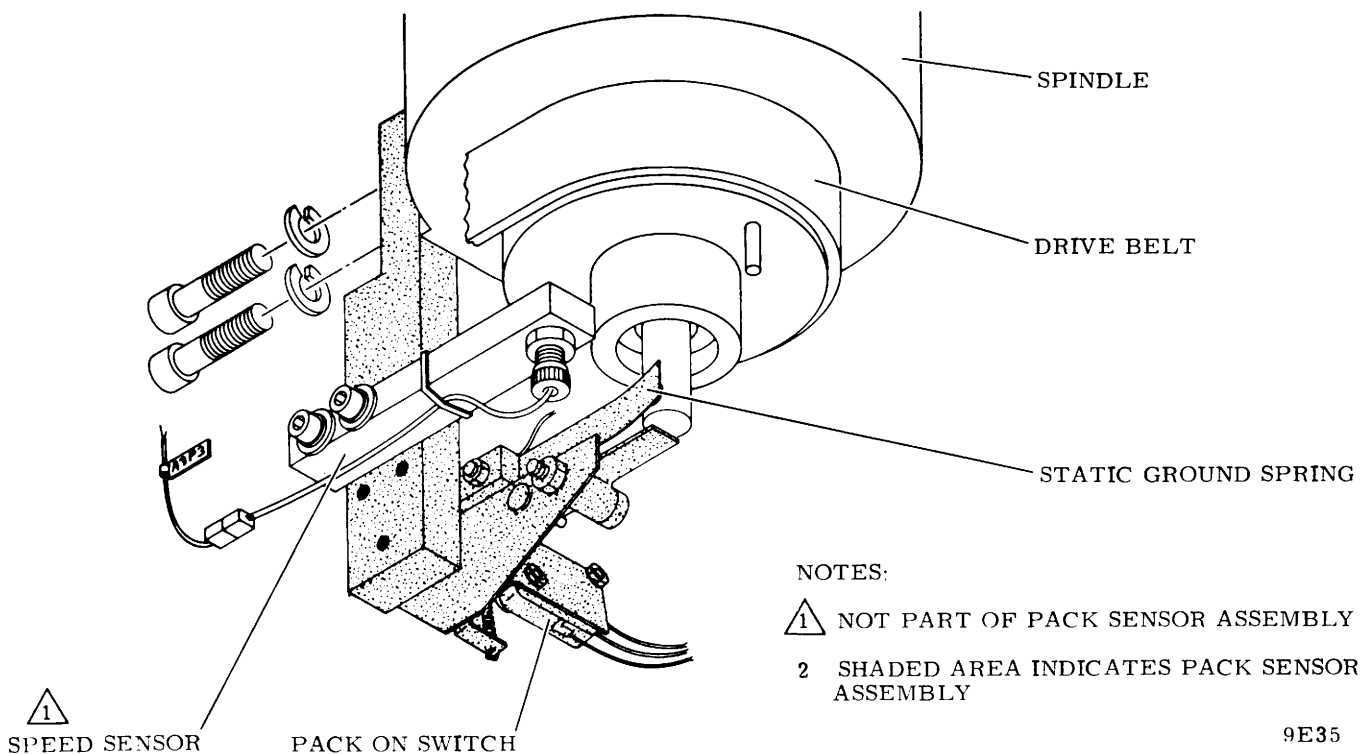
Pack Sensor Assembly Replacement (S/C 08 and Below)
